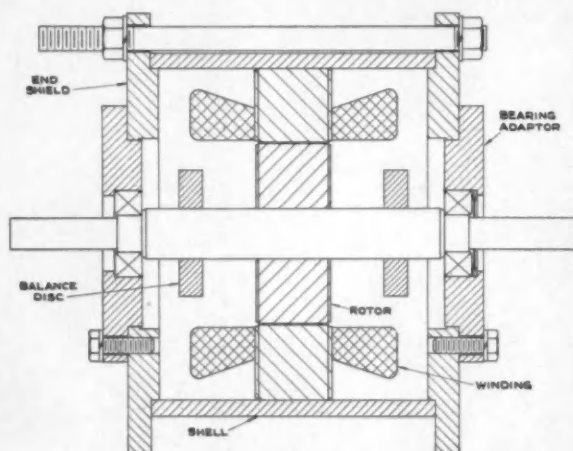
Bearing outer race misalignment and radial play are deliberately machined into this high-speed test fixture. Armature removal will not disturb stator housing or end plates.
